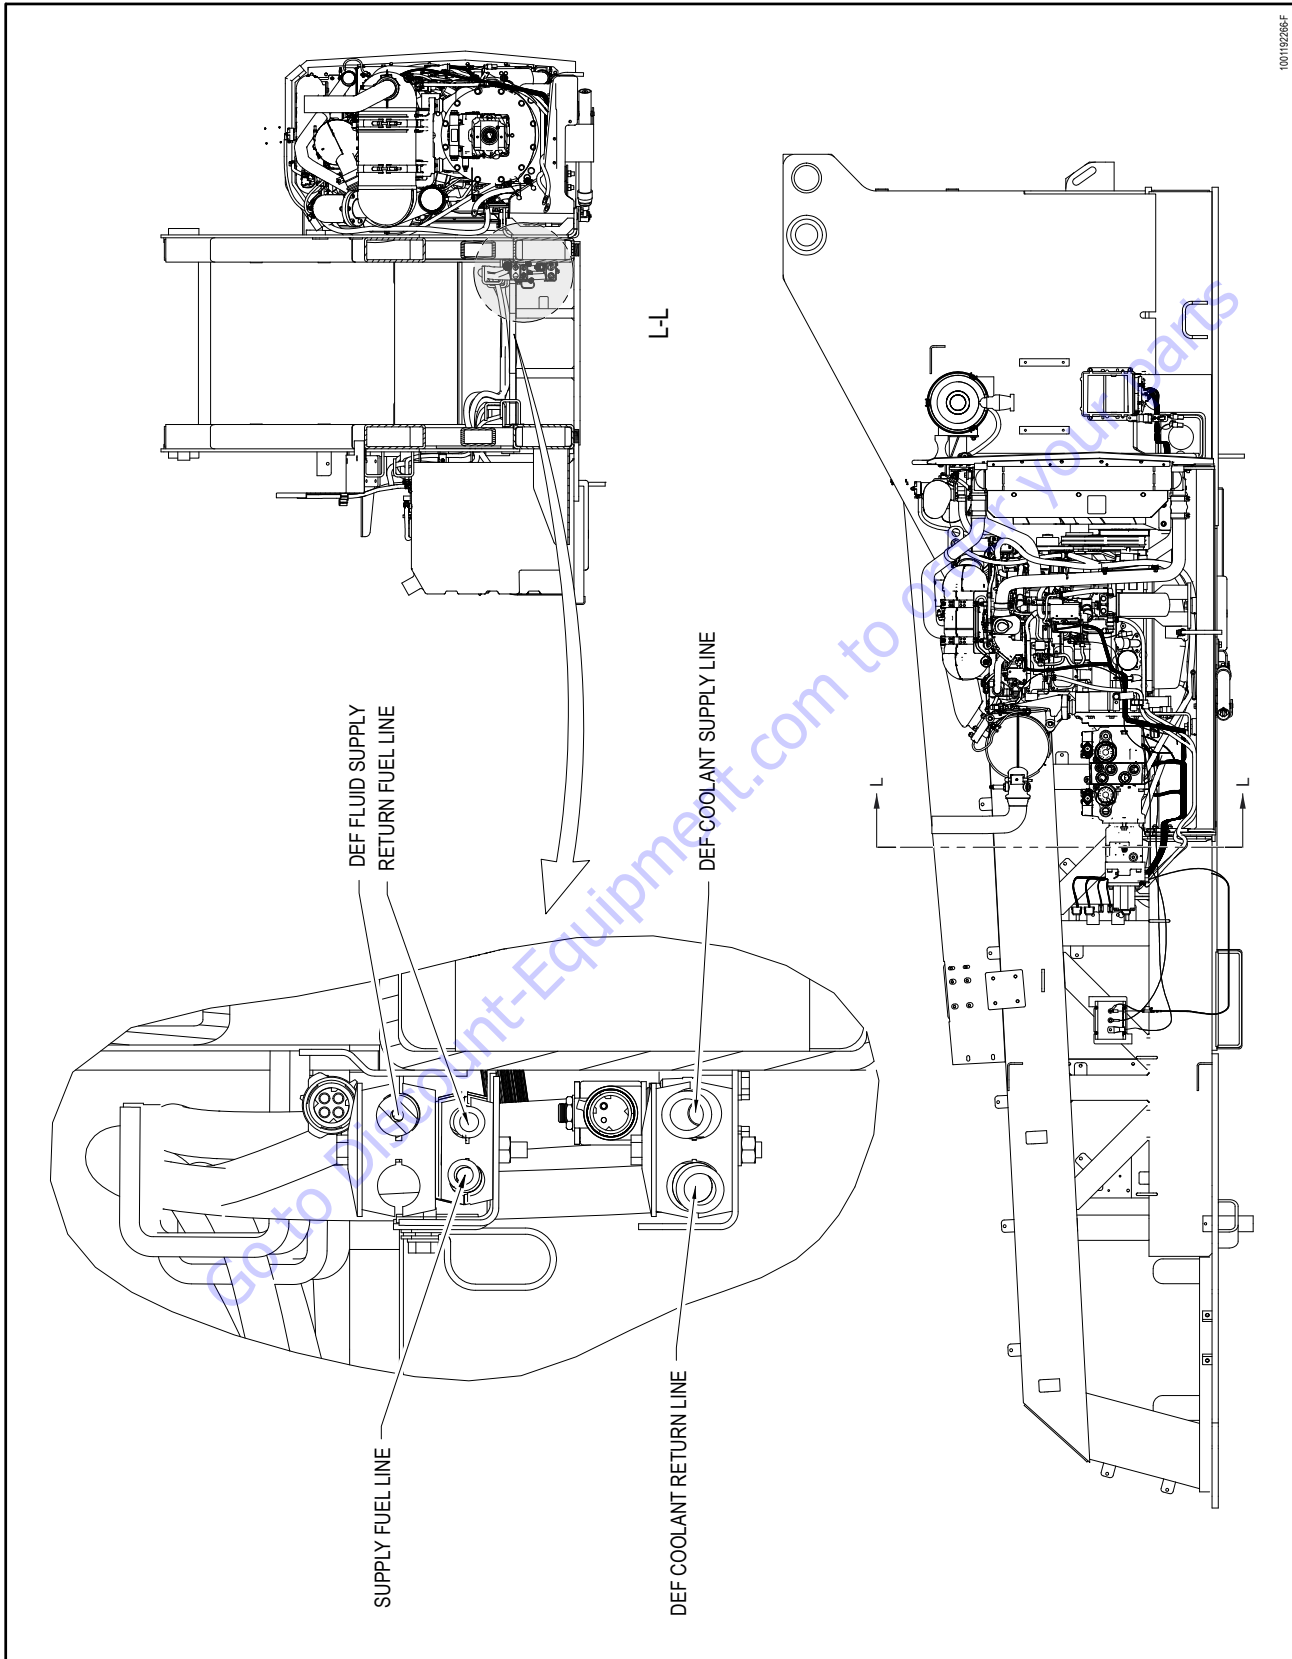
Engine Installation and Diesel Exhaust Fluid (DEF) System - Sheet 4 of 8
